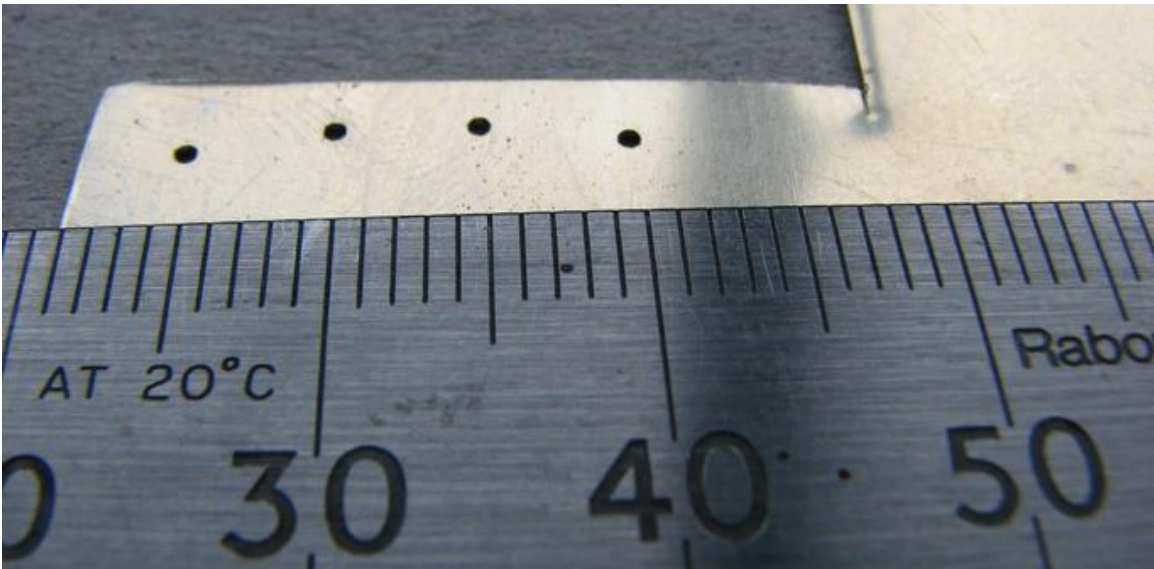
Shows the drilling of a piece of 10 thou nickel silver sheet for the replacement return cranks,
